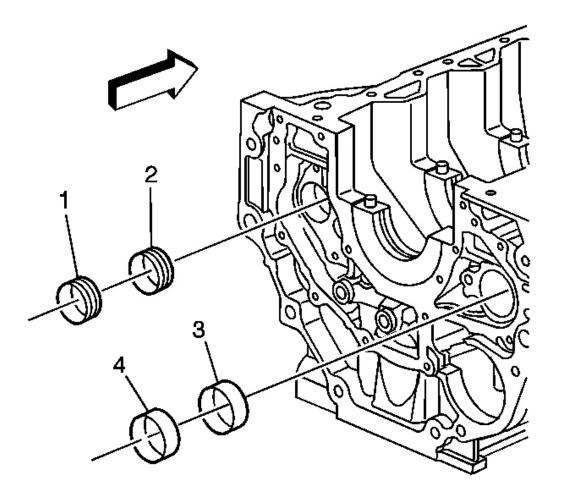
Identifying Front & Rear Bearings Courtesy of GENERAL MOTORS CORP.
